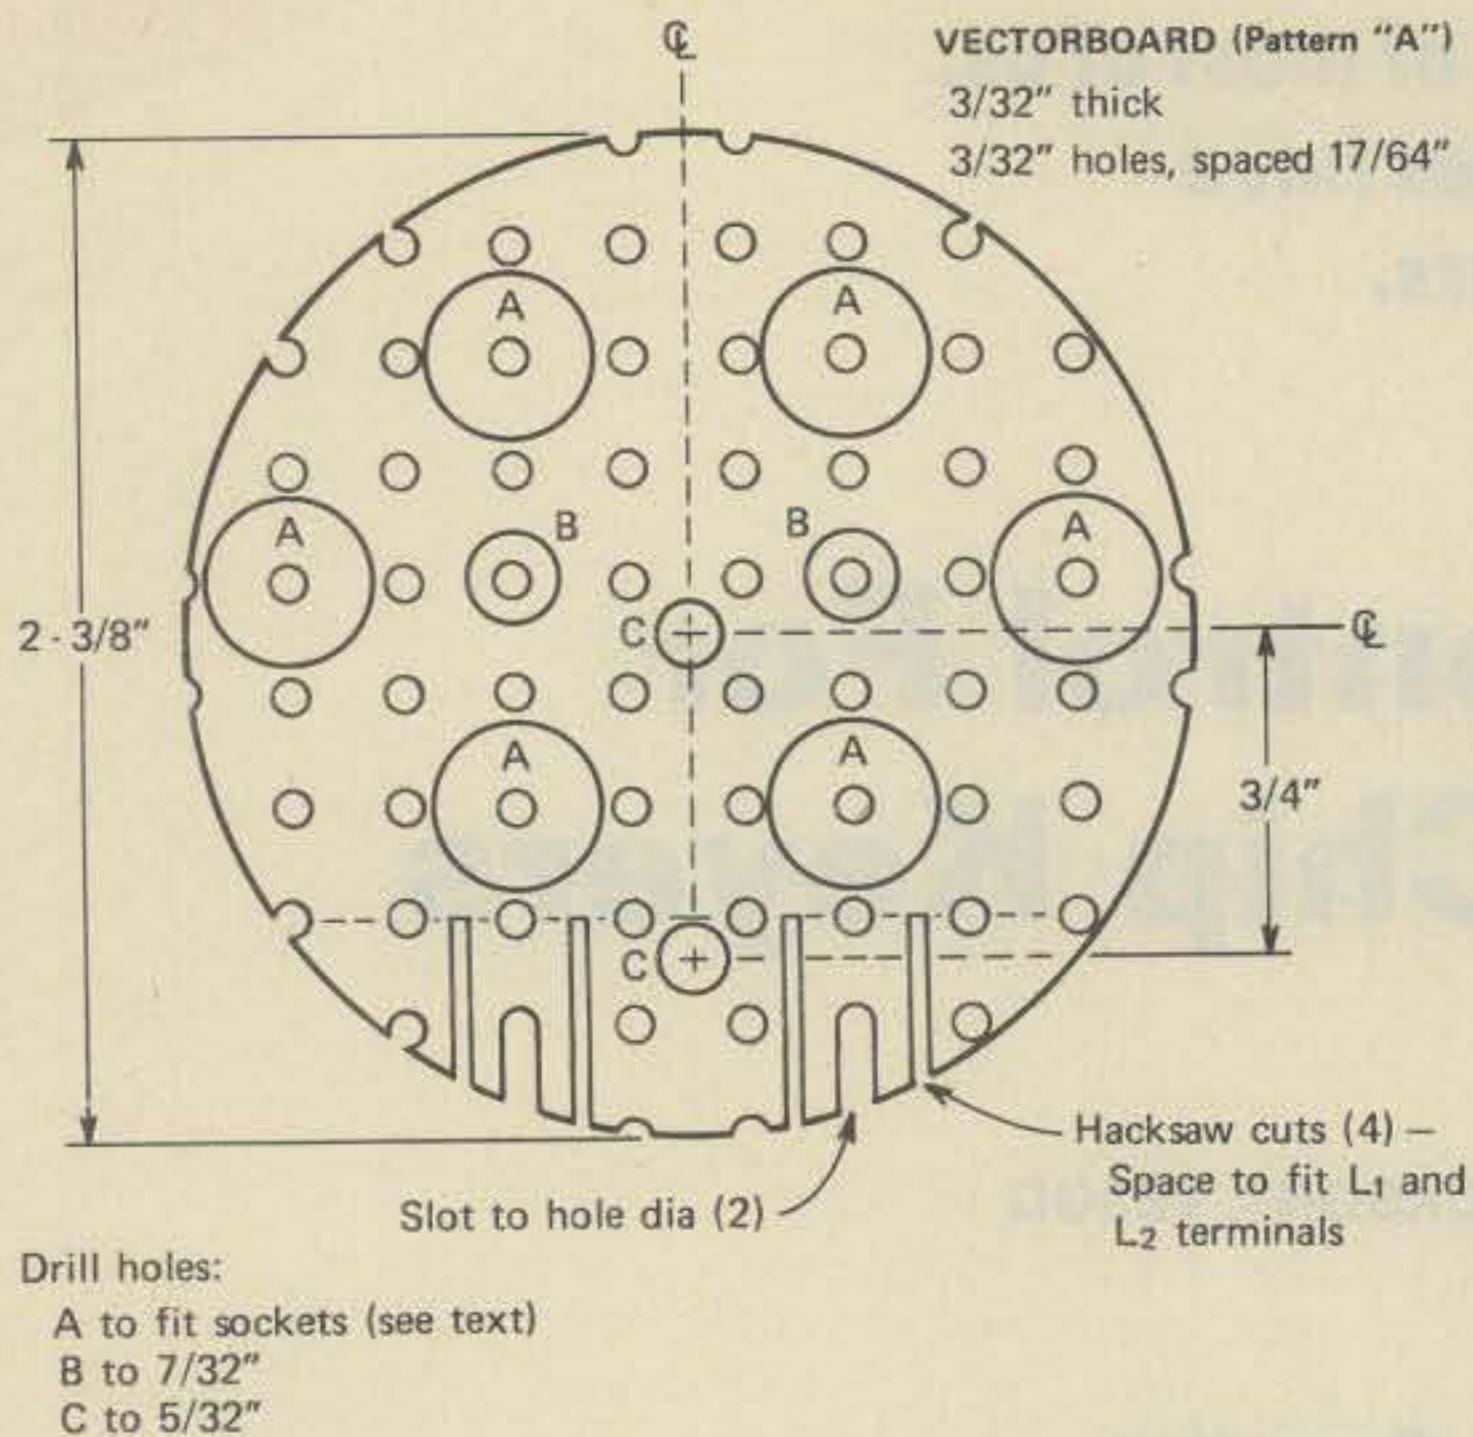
Here are details of the symmetrical circuit board. The pre-punched holes are used wherever possible to center drills, mount parts, etc.
